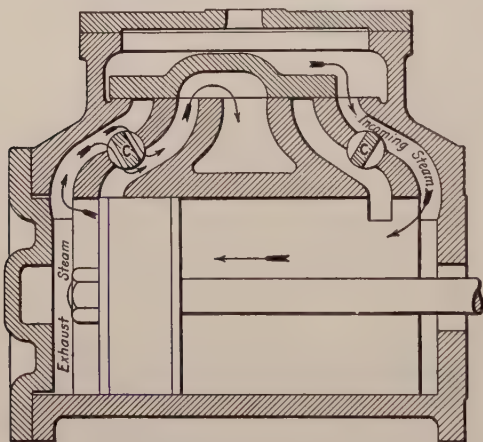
Worthington Steam Cylinder with cushion valves.
